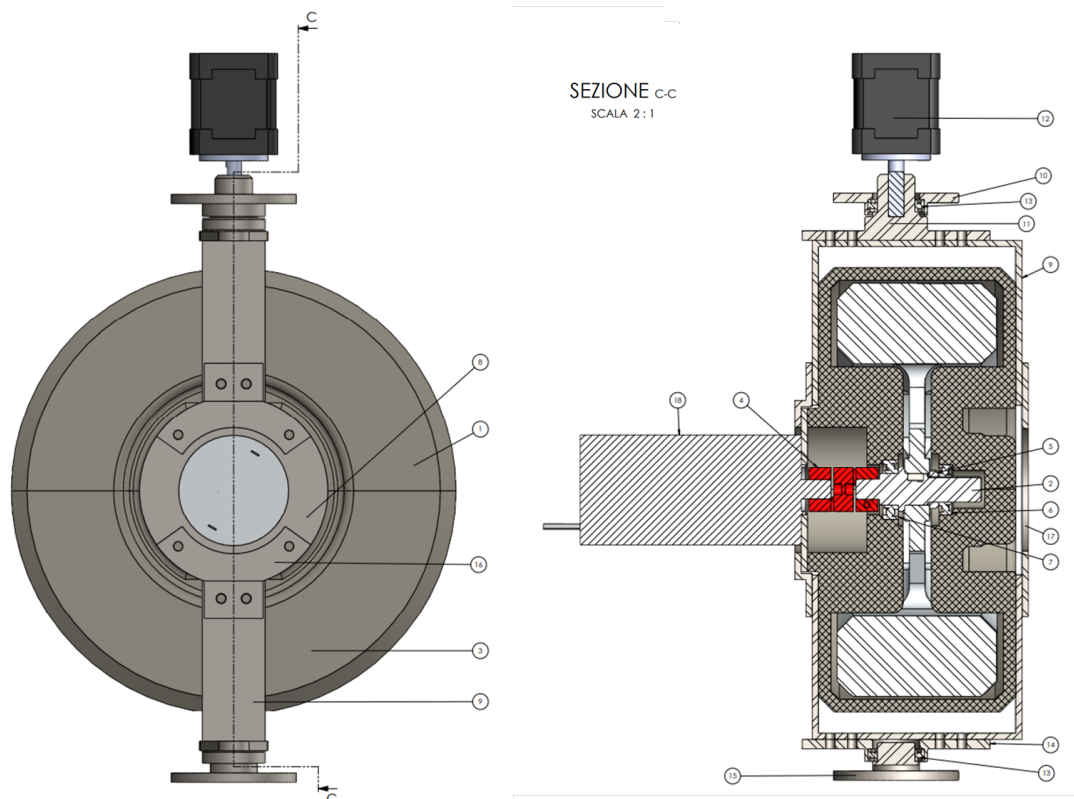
Front view and lateral cross-section of the gyroscope. The components are: 1) first half of the case, 2) shaft, 3) second half of the case, 4) Jaw coupling, 5) Spacer, 6) Small angular contact ball bearing, 7) Big angular contact ball bearing, 8) Motor plate, 9) C-plate for tilting motor connection, 10) Flange₁ for main structure connection, 11) Flange₁ for tilting motor-gyroscope connection, 12) Tilting motor, 13) Angular contact ball bearings for tilting axis positioning, 14) Flange₂ for tilting motor-gyroscope connection, 15) Flange₂ for main structure connection, 16) Motor-to-C-plate connection plate, 17) Closing Plate, 18) Spinning Motor.
